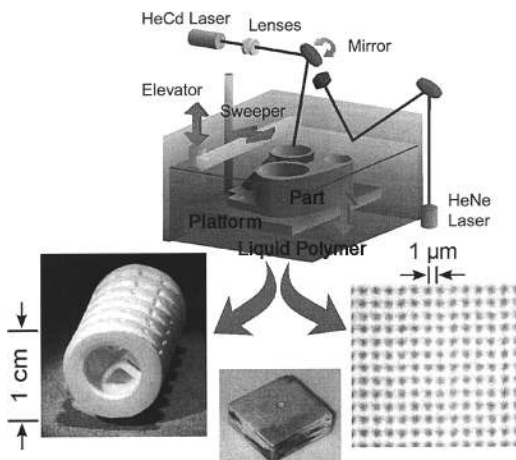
Stereolithography process with examples of fabricated parts. The finished reactor, showing inlet and outlet holes on the front surface, is shown in the center.
